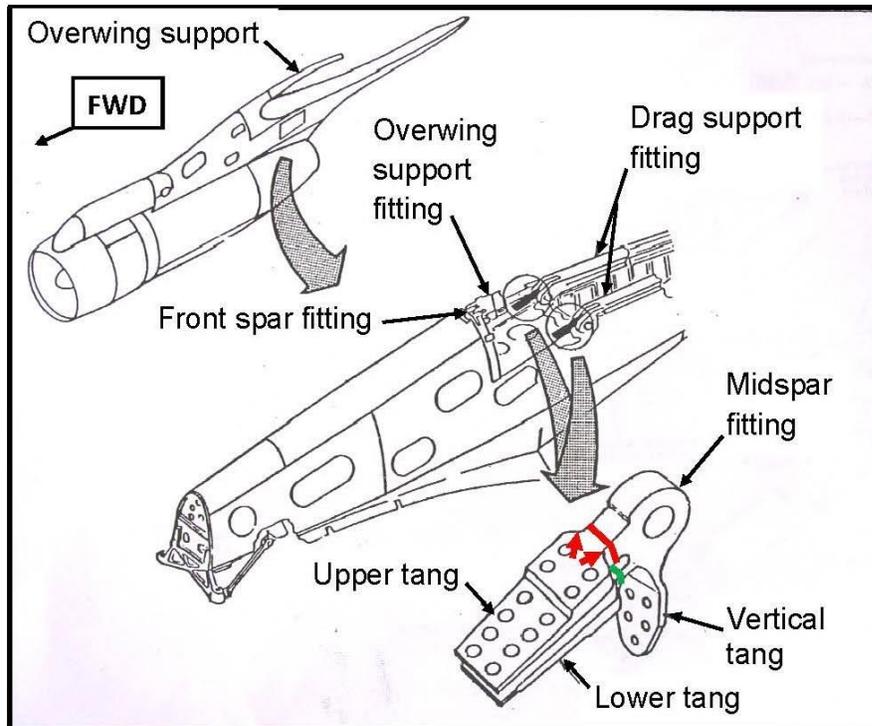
Diagram of a Boeing 707 engine nacelle strut, showing the fracture area on the midspar fitting.
